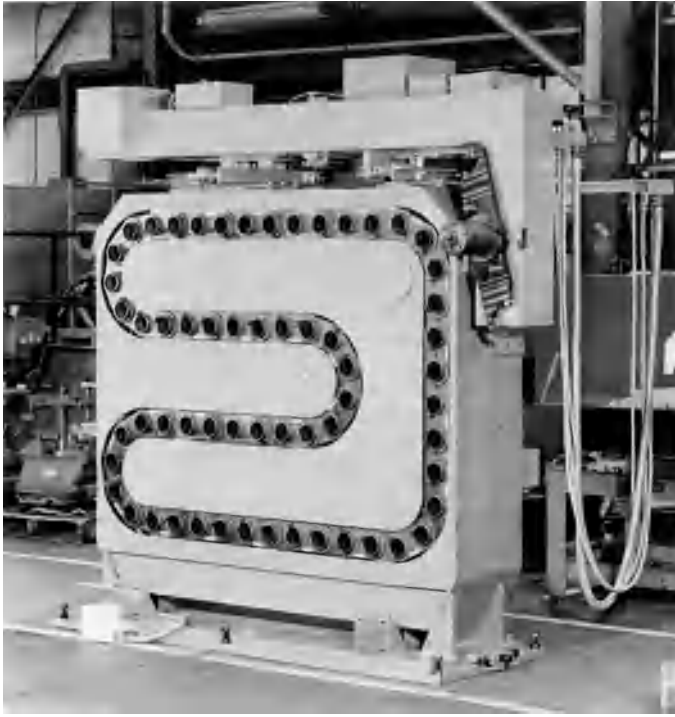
A 60 tool capacity chain-type magazine for a machining centre. [Courtesy of FMT Ltd.]
